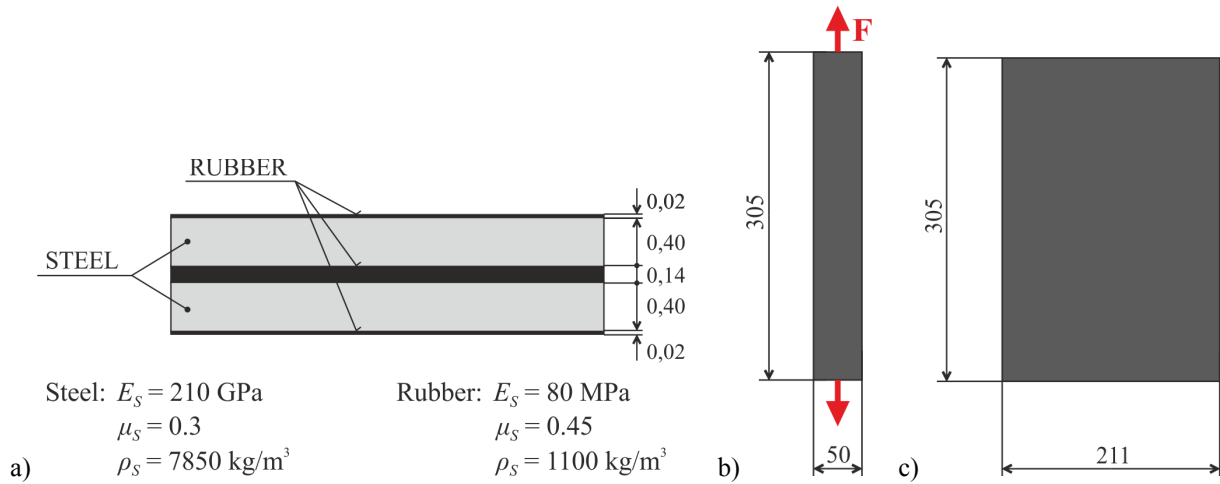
a) Material properties and ply layup of the sheet, b) Dimensions of a tensile specimen, c) Dimensions of the sheet.
